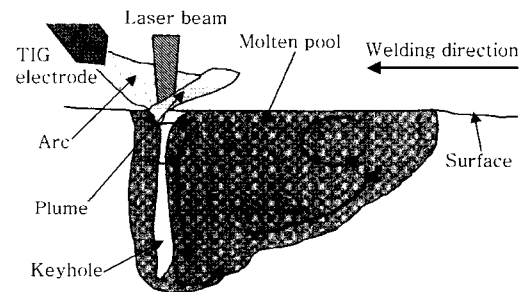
Schematic representation of keyhole and liquid flow in molten pool observed during TIG-YAG hybrid welding of STS304 with GI fiber
